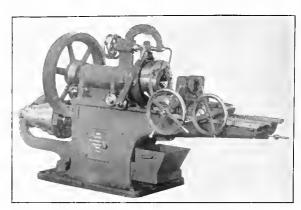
4-Inch Bolt Cutter. Acme Machinery Co.
